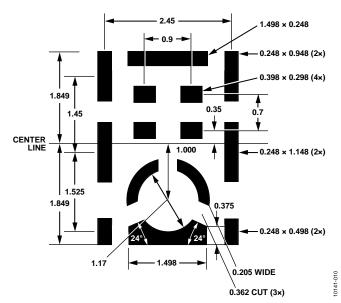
Suggested Solder Paste Stencil Pattern Layout
